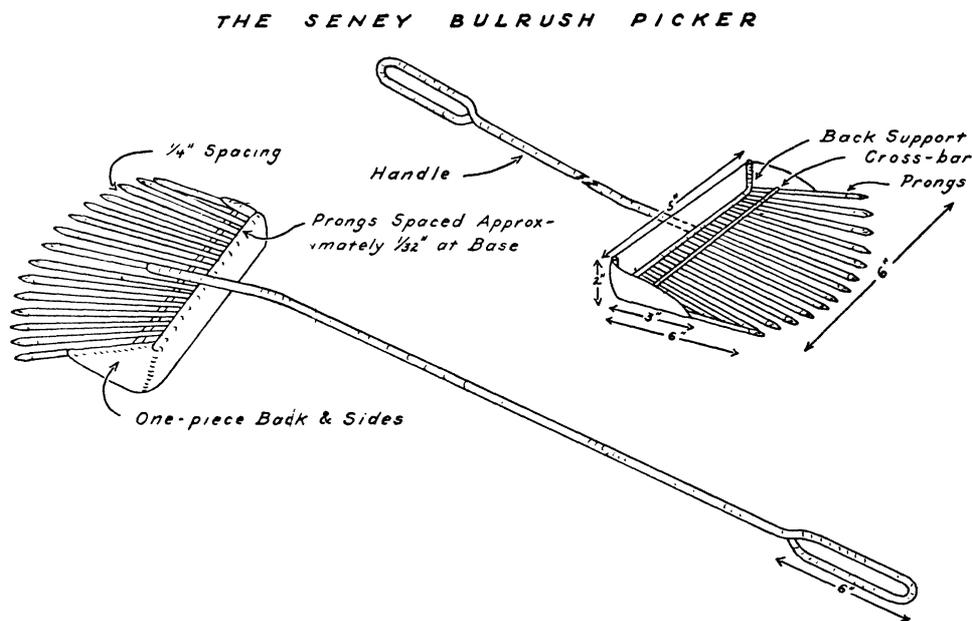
Seney bulrush picker. Overall length, 24 inches; contains 30 prongs, but only 15 shown. Materials: back and sides, 28 gauge galvanized sheet metal; other parts of hi-test steel welding rod as follows: back support,  $\frac{3}{16}$  inch; prongs and cross bar  $\frac{3}{8}$  inch; handle,  $\frac{1}{2}$  inch.
